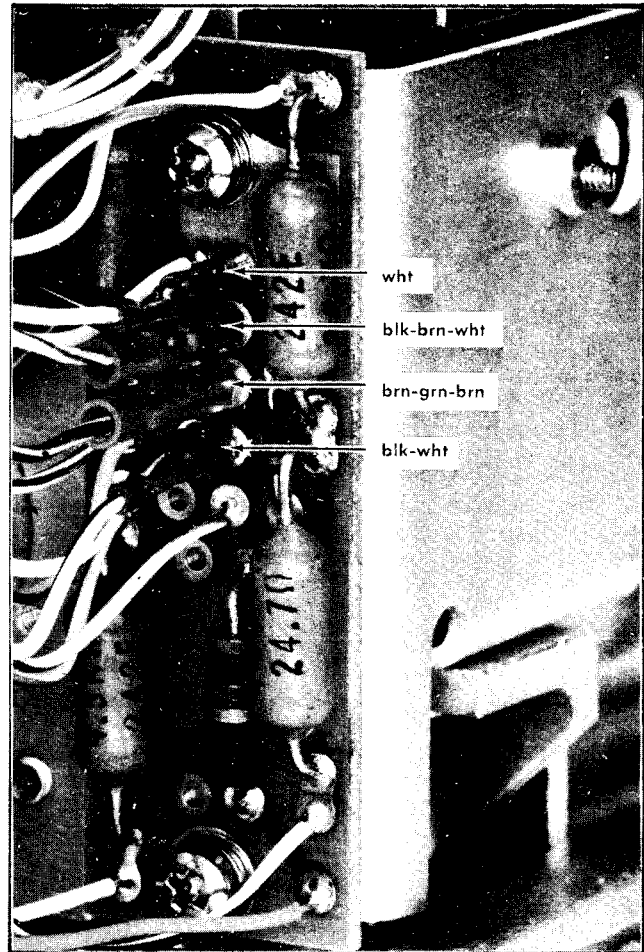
Connector assembly board for the RF oscillator assembly and wiring color code to the pin connector.
